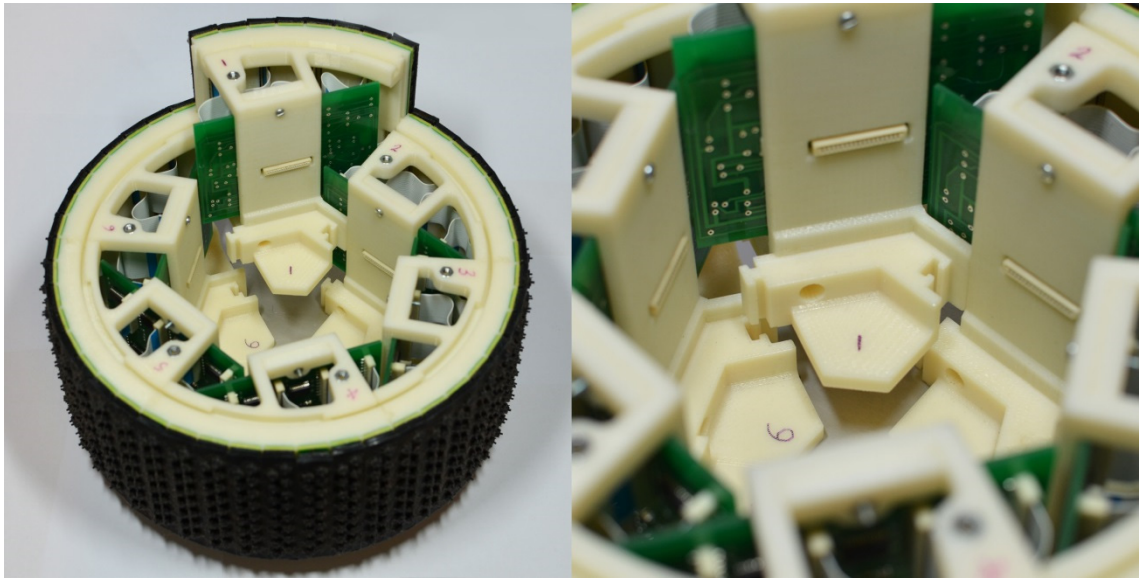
Wheel Segments slotting together. The 6 assembled Wheel Segments were slotted together, located using the tongue and groove slots seen close-up in the image on the right.
